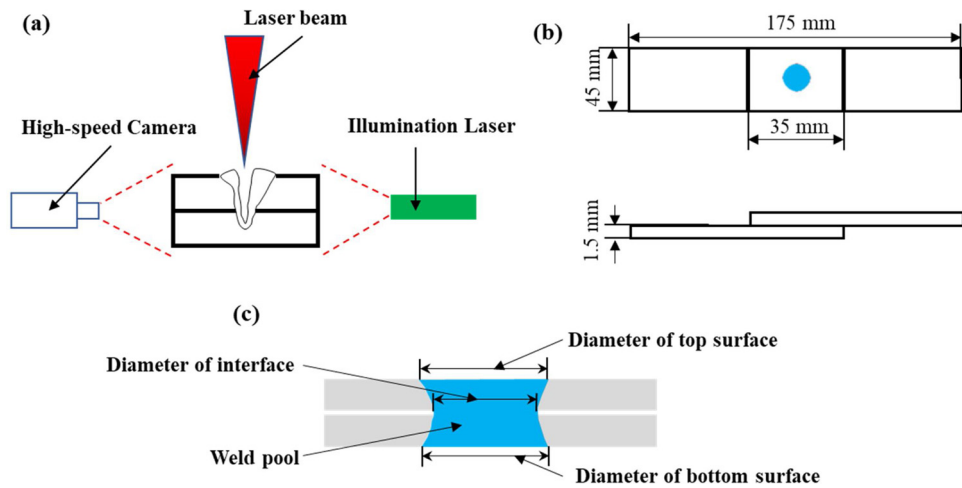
Schematic diagram of (a) experimental setup; (b) tensile-shear test sample and (c) the defined weld diameters.
